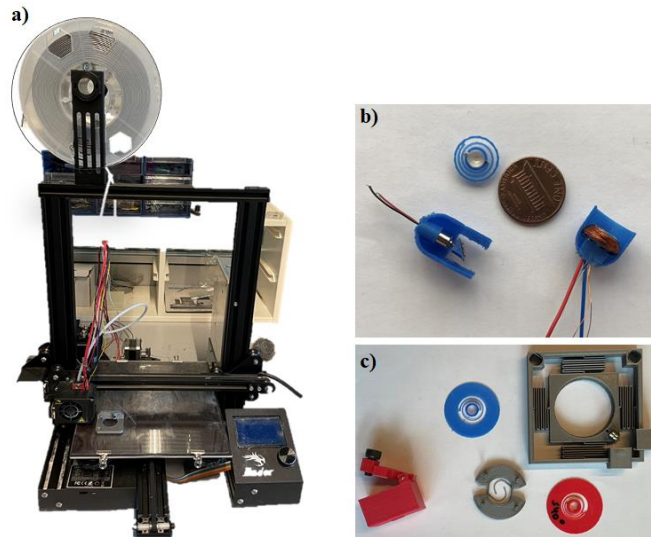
a) the FDM machine presented in our EDL LAB. b)&c) some mechanical parts printed by the device in a) with different sizes for different functions.
